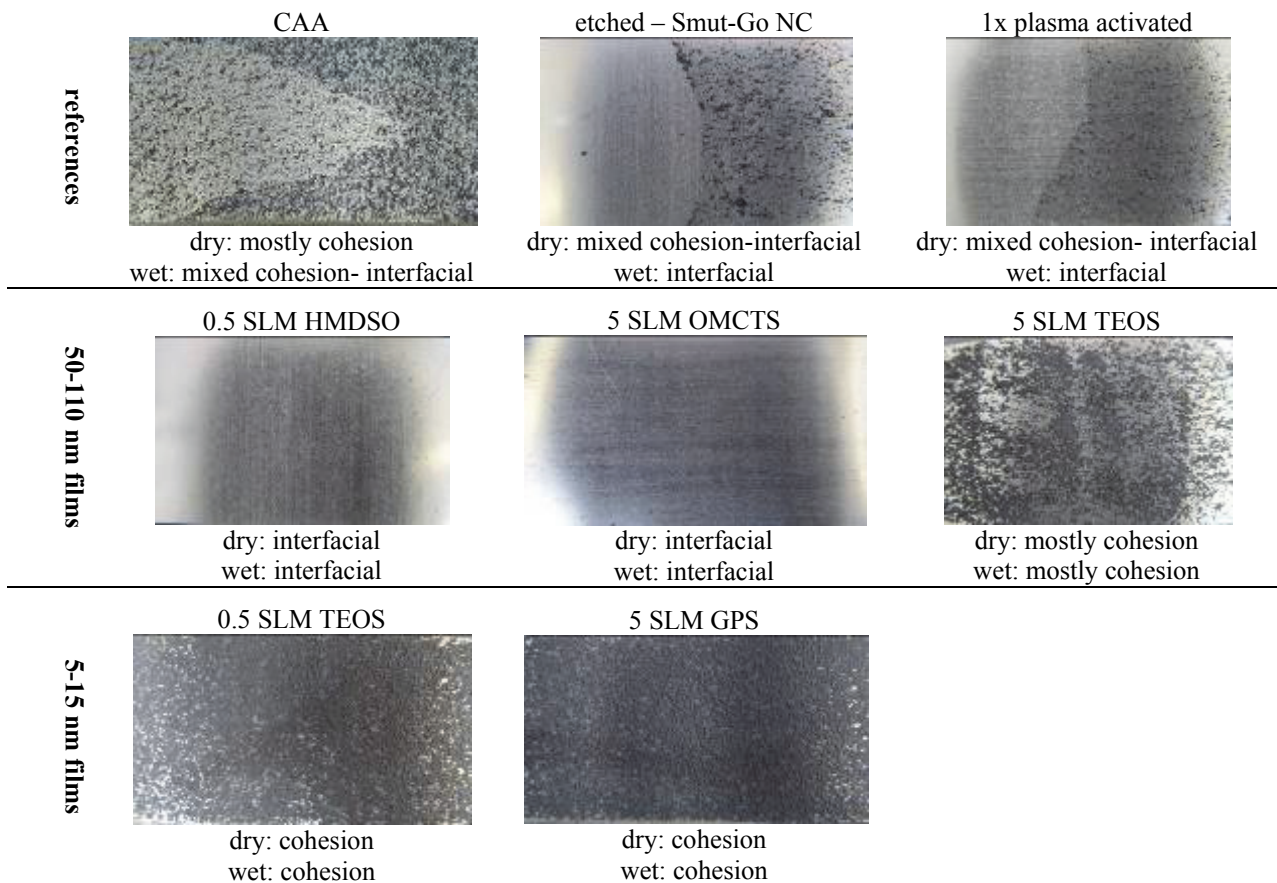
Fracture images of peel sheets of DP 490 joints: transition zone dry → wet
